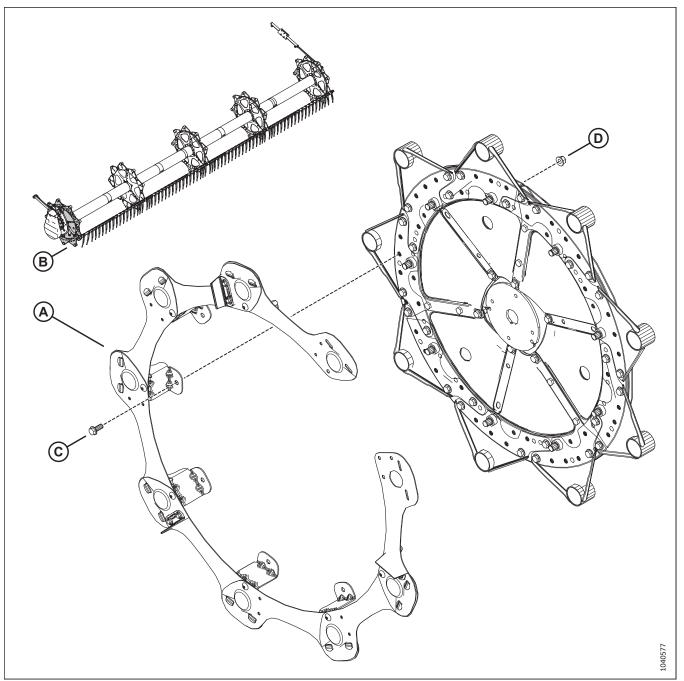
Nine-Bat Reel – Initial Endshield Assembly
